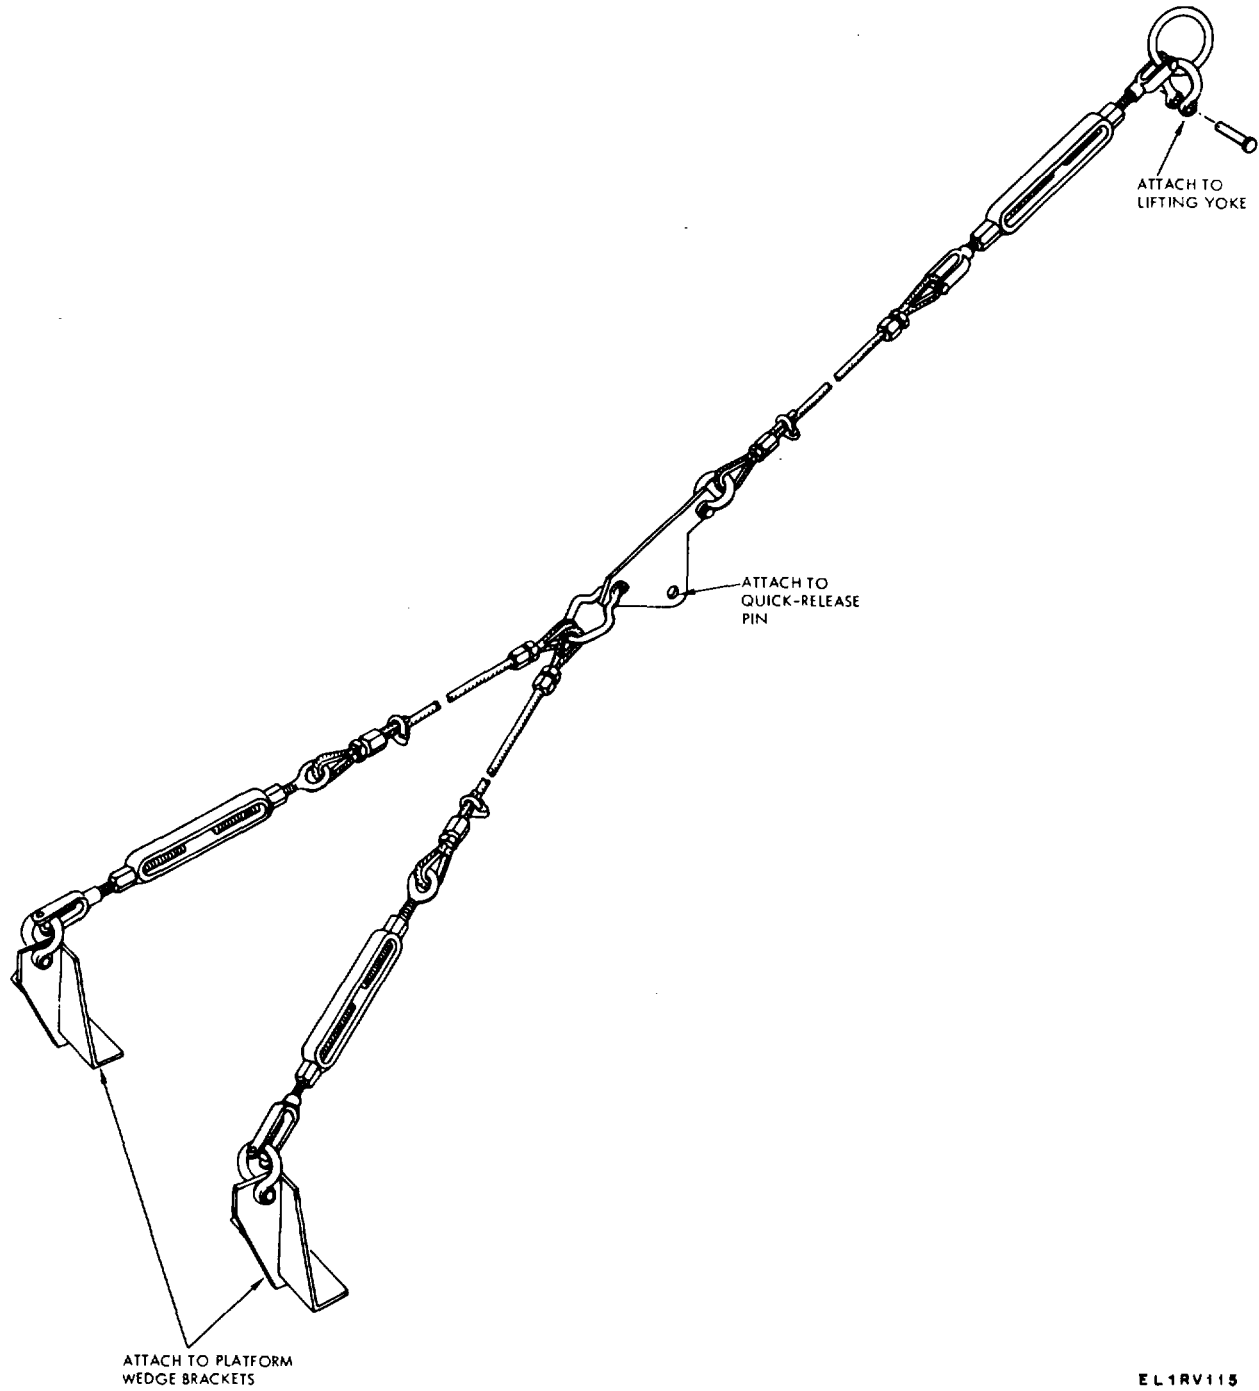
Antenna carrier lifting cable assembled for helicopter airlift.
